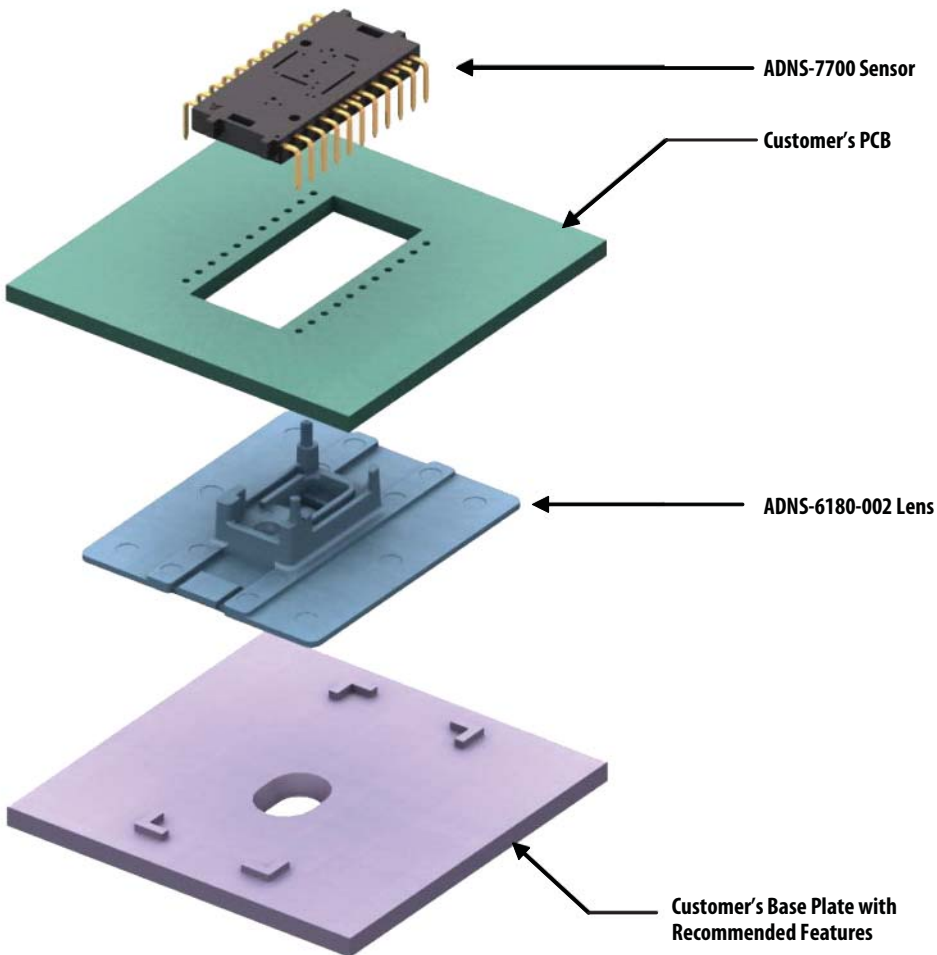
Exploded view drawing of ADNS-7700 sensor coupled with ADNS-6180-002 lens, PCB & base plate
